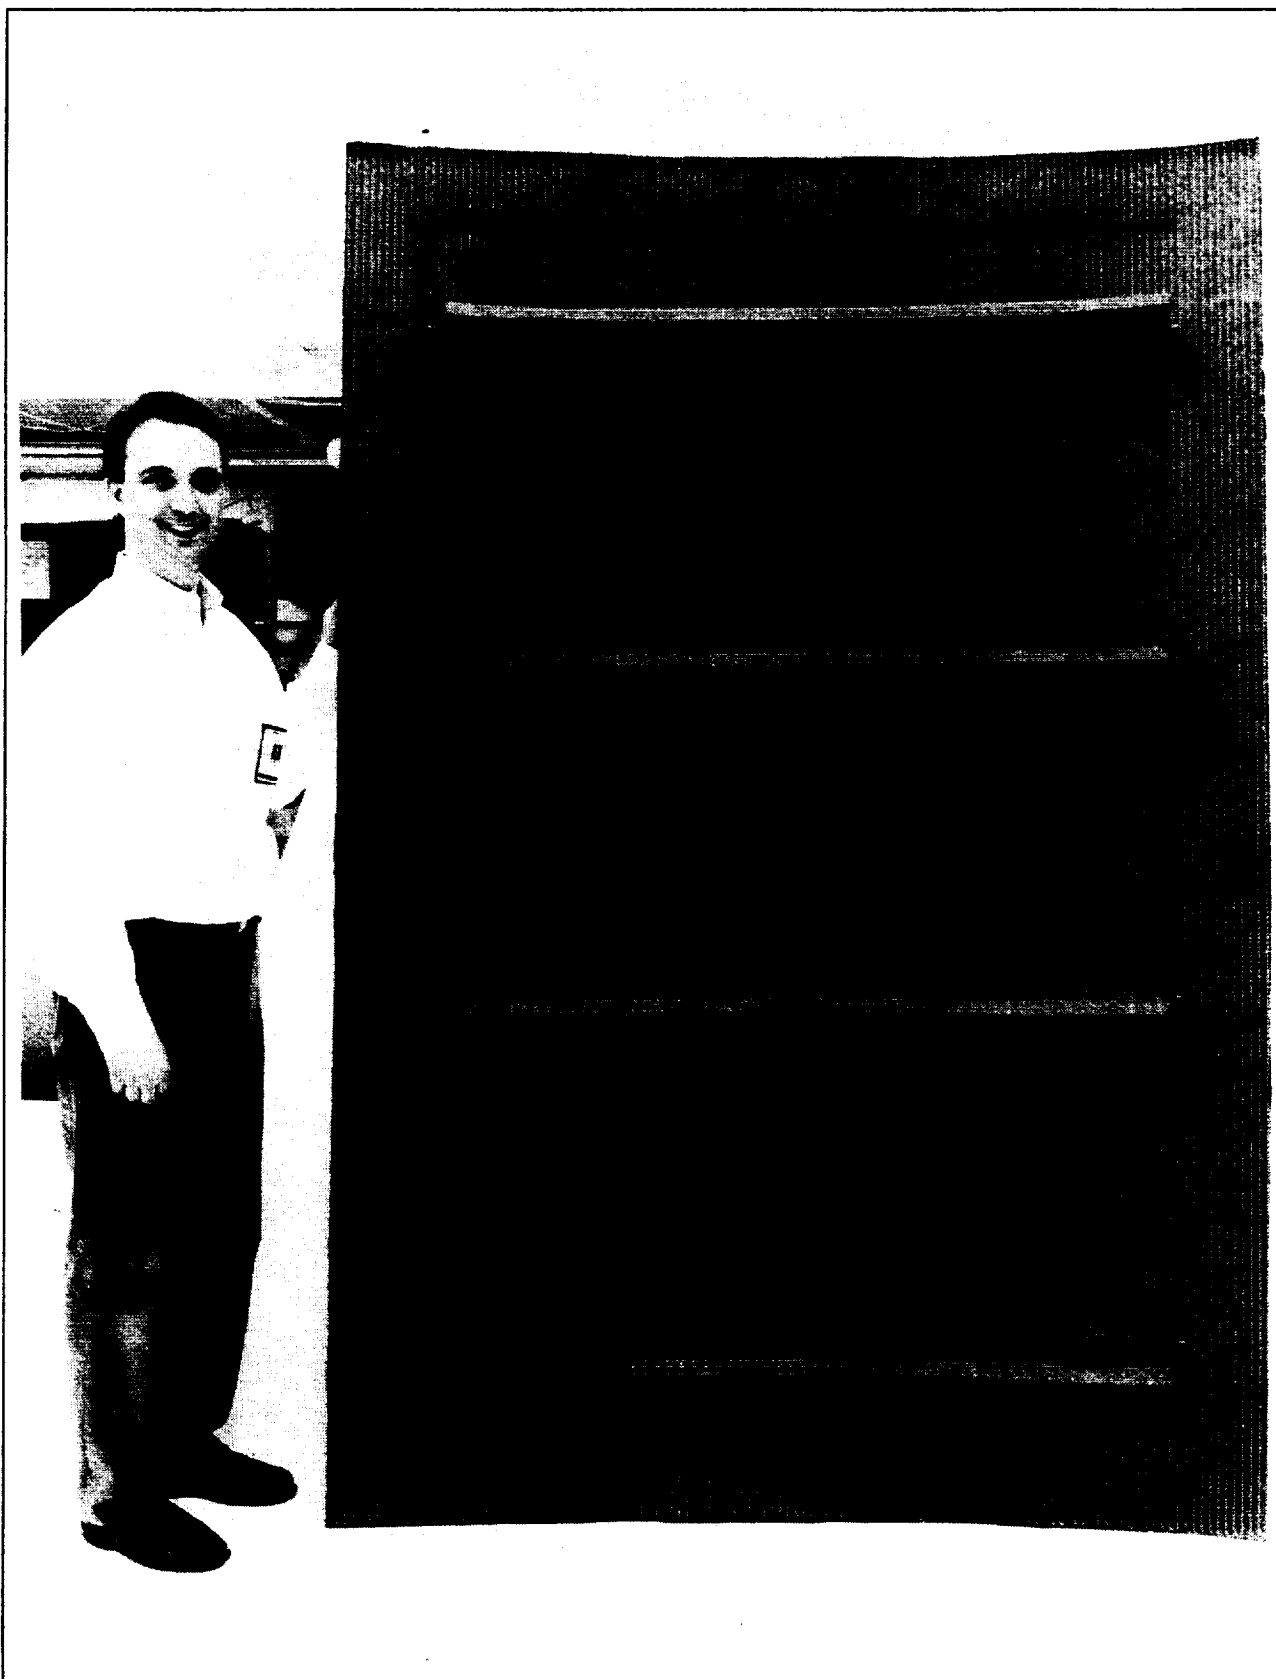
Assembly of Lower Fuselage Panel Cross-stiffened Preform
